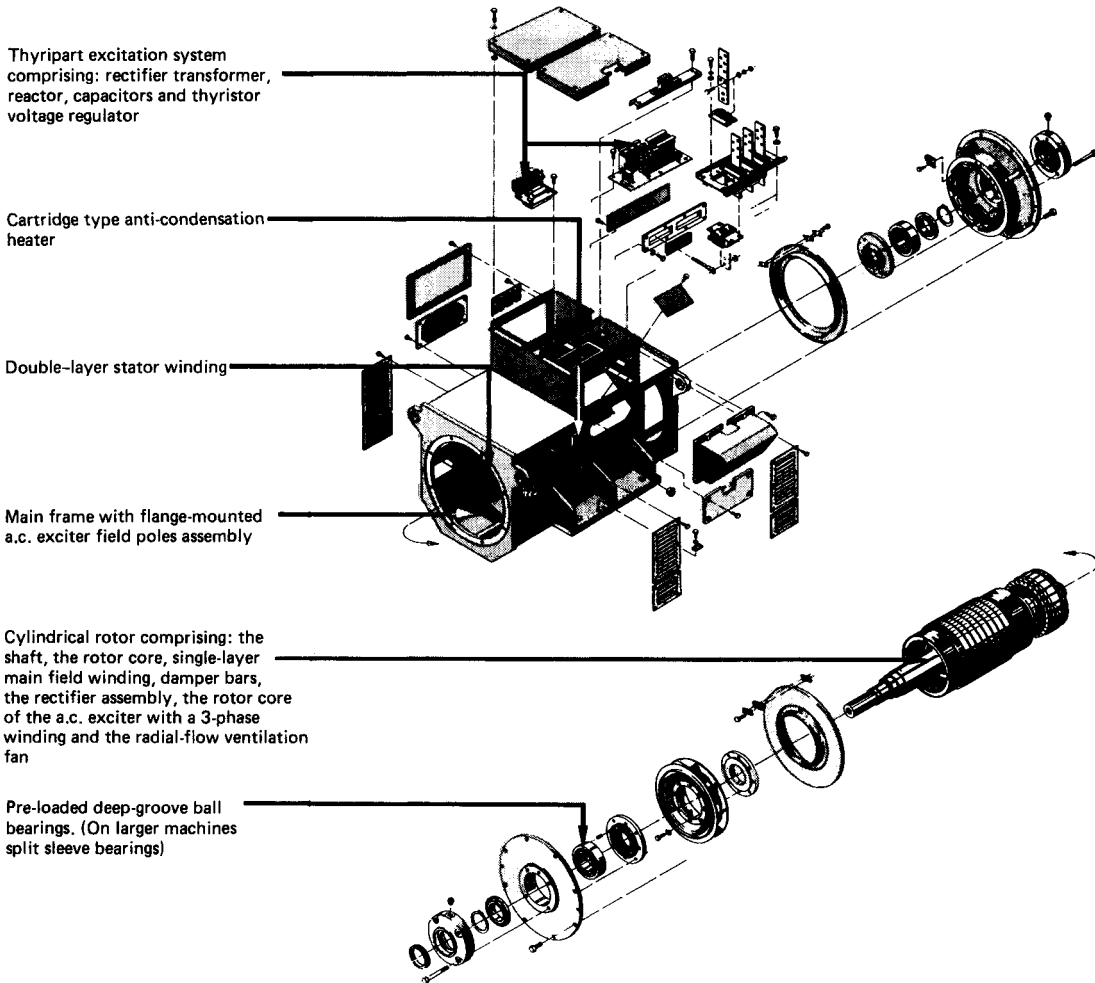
Exploded view of a series 1FC6 compounded brushless generator (Courtesy: Siemens PLC)
